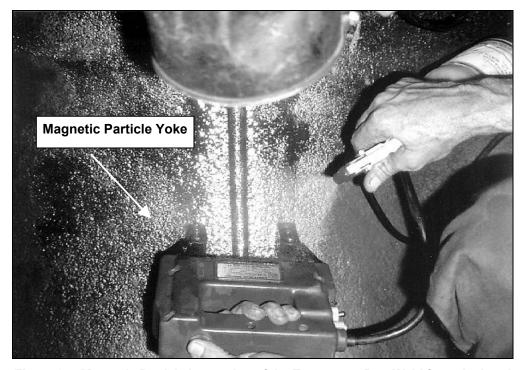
Magnetic Particle Inspection of the Transverse Butt Weld from the Interior of the Tank Car
